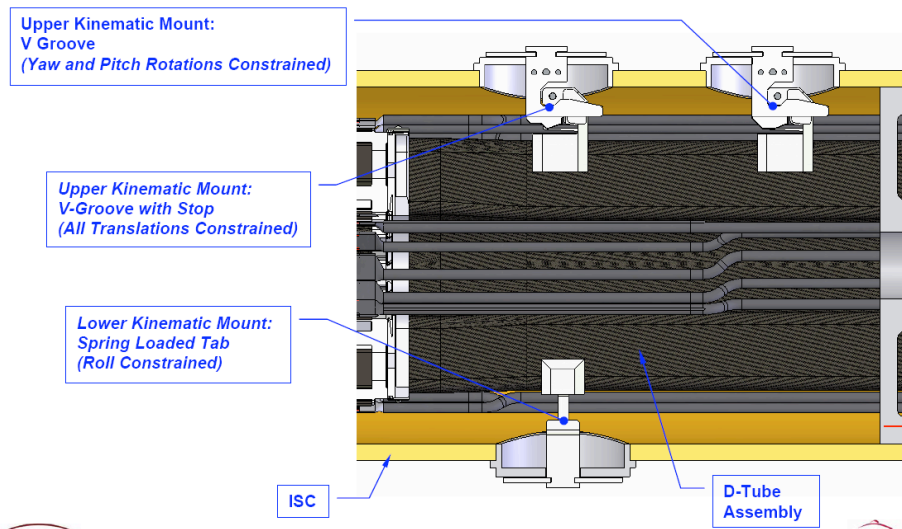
Detailed view of the kinematic docking mounts for the PXL detector. The mounts provide a fully constrained support and operate with a spring loaded over center lock down.
